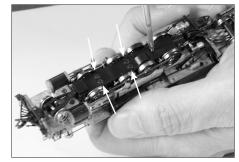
Remove the five Phillips head screws on the chassis plate.
